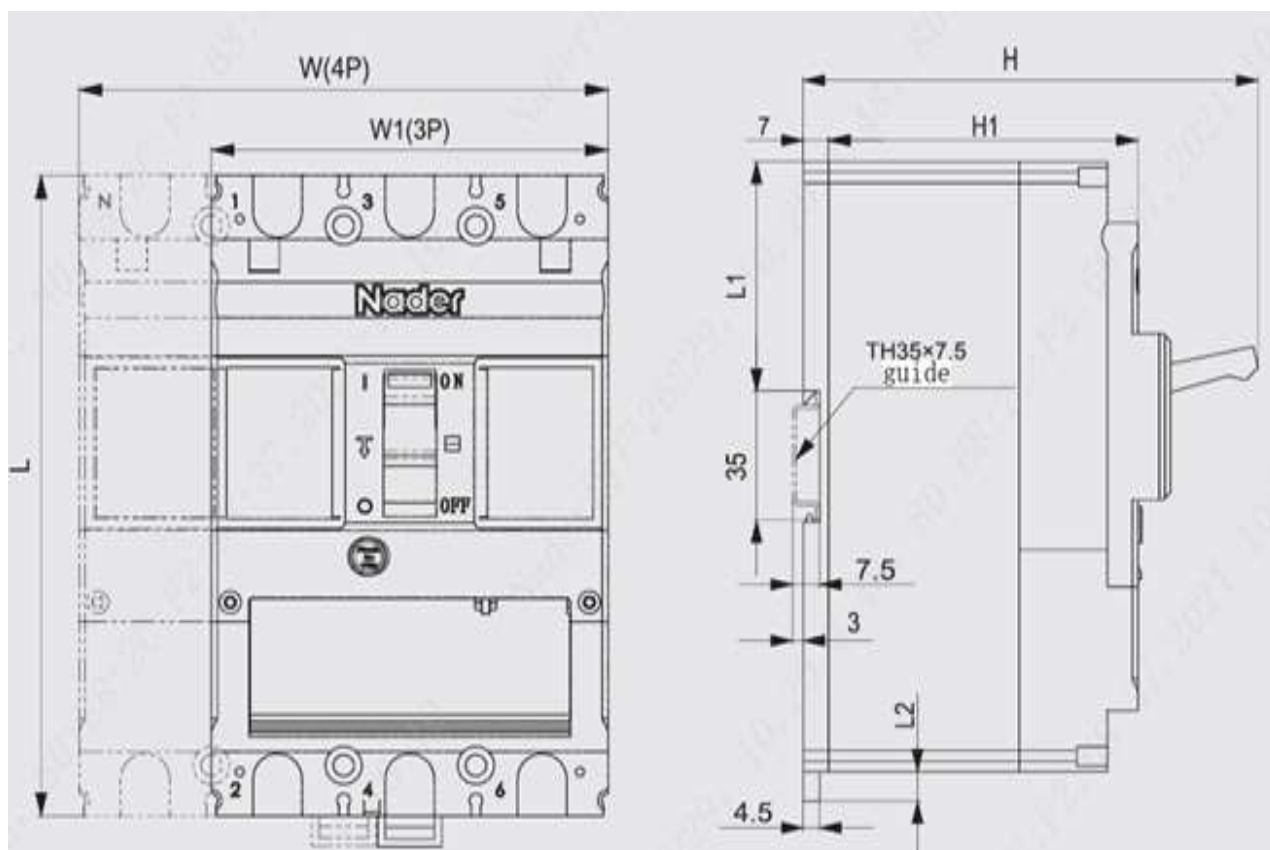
Outline and installation dimensions drawing of guide rail type safety rotation products
